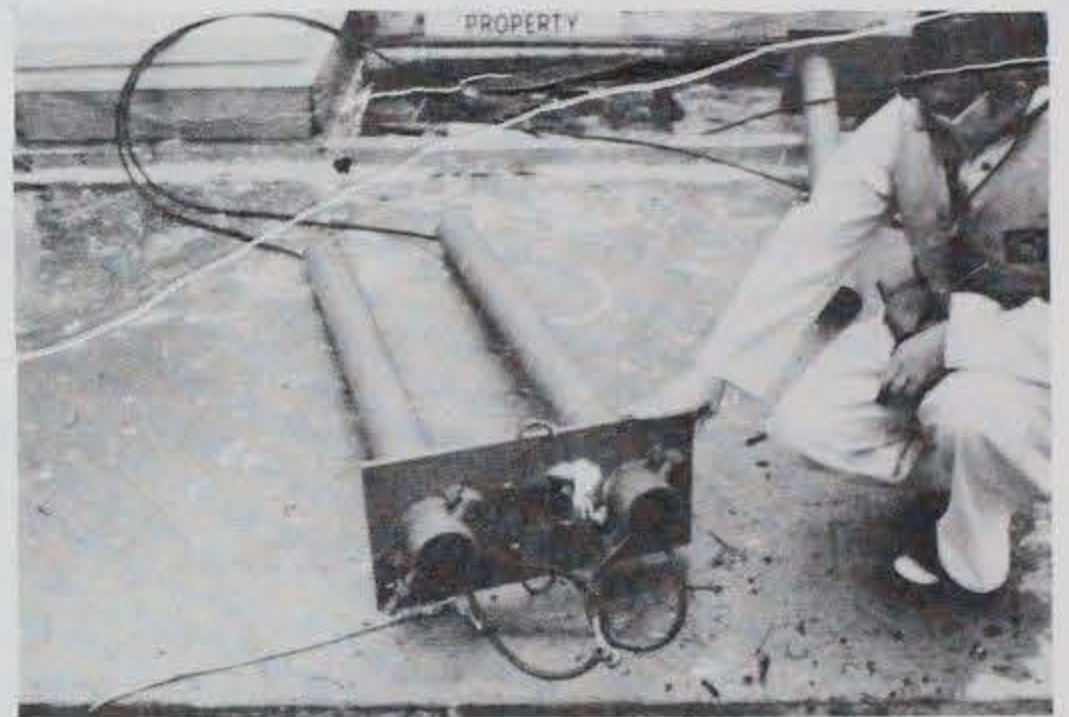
A U-shaped bracket being fabricated to connect the rubber fenders.
